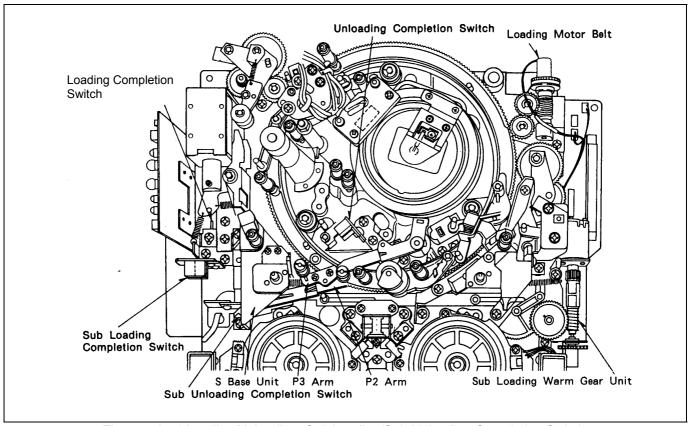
Loading/Unloading, Sub Loading/Sub Unloading Completion Switch
